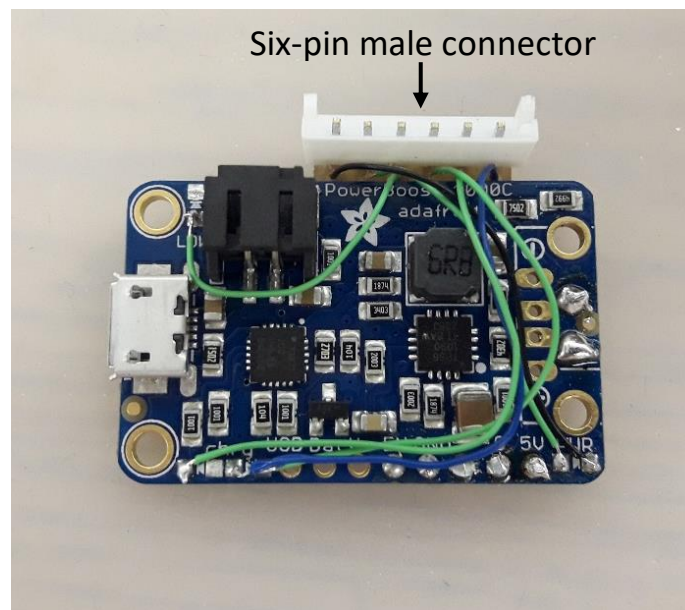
PowerBoost Board with surface-mount LEDs removed and connectivity made to six-pin male connector.
